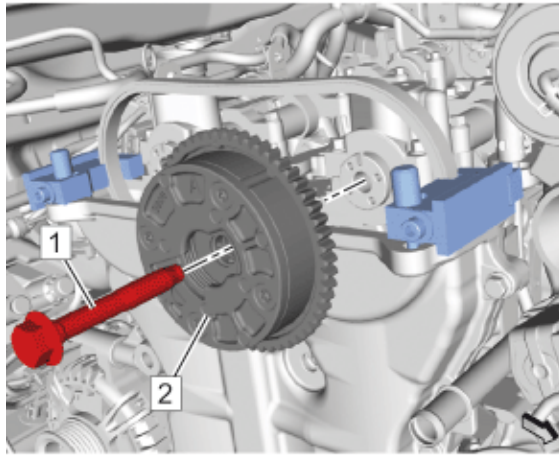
Exhaust Camshaft Position Actuator And Bolt
